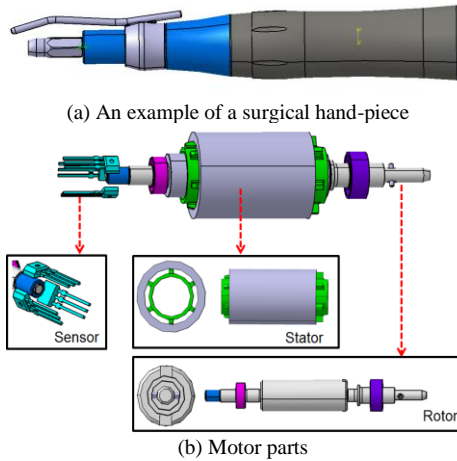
A BLDC motor assembly and its parts used for a small surgical hand-piece.
